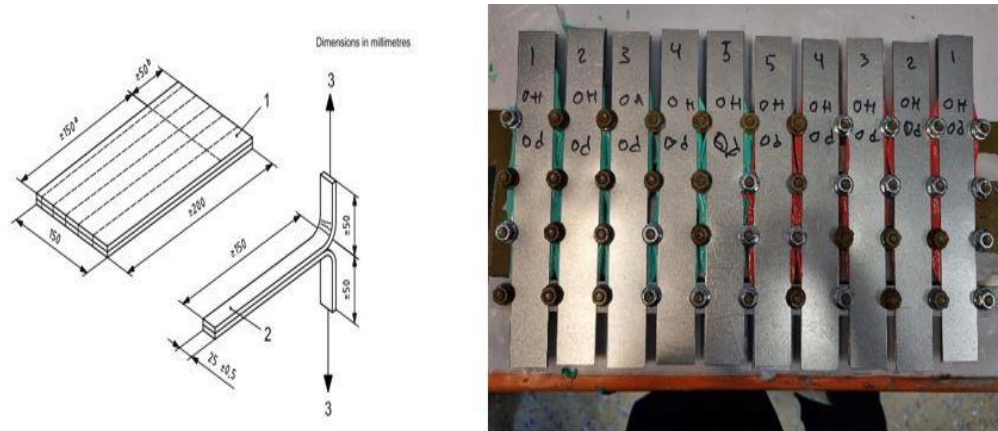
Illustration of the T-peel samples, left is a sketch while right picture is a real-life image.
